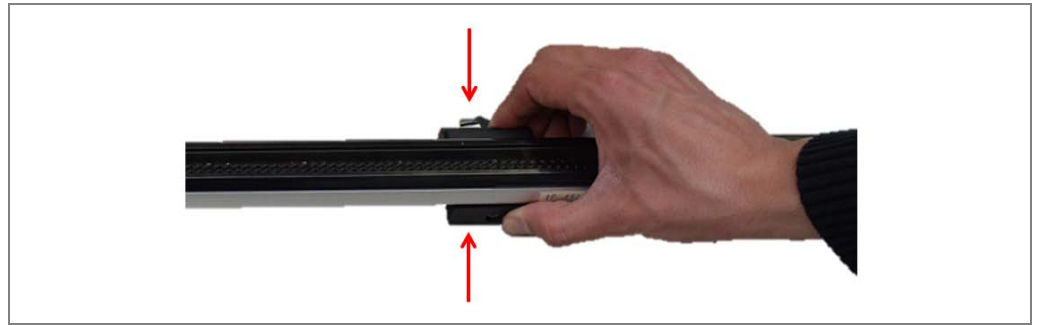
Attaching the QuickFix bracket to the MLG-2 housing
